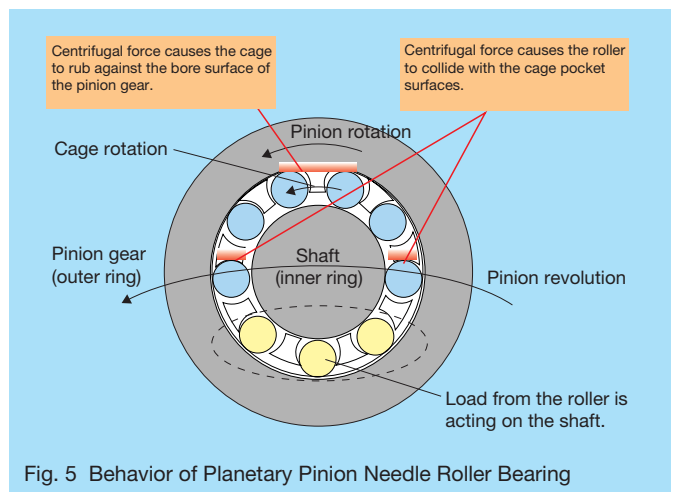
Behavior of Planetary Pinion Needle Roller Bearing
